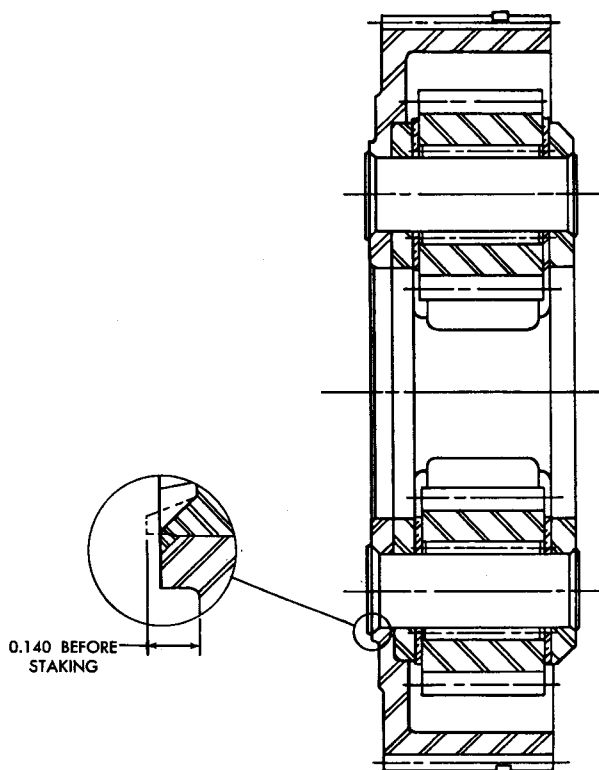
Reverse-range planetary carrier assembly—cross section, showing pin dimensions
